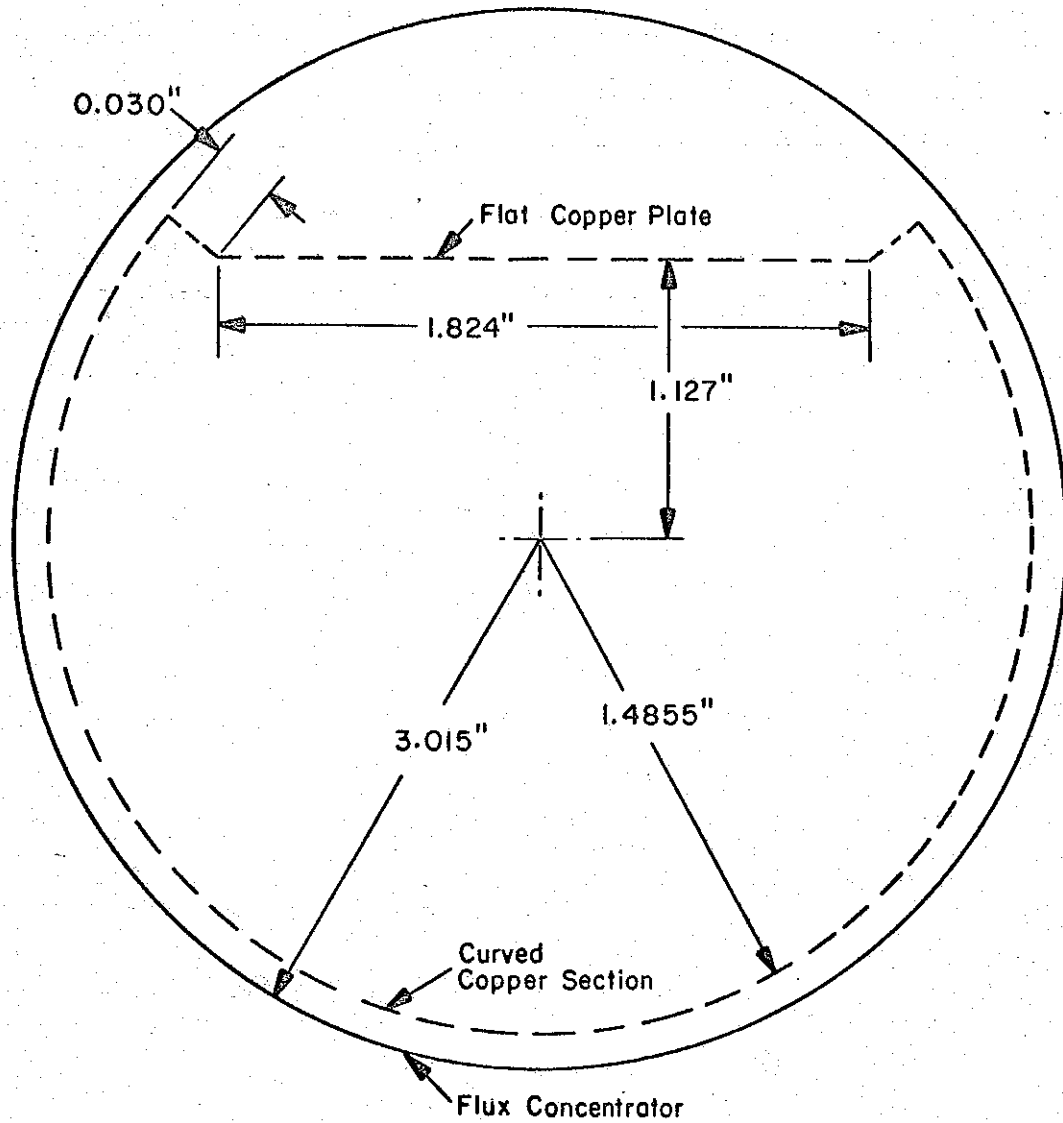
Cross-sectional view of workpiece -- flat copper flyer plate experiment.
